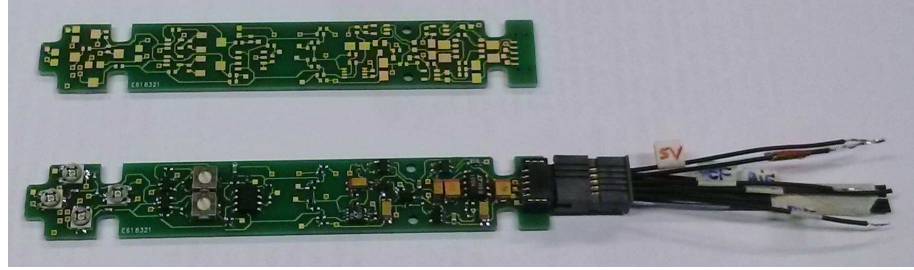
Photograph of two manufactured PCBs, one of them with all the components welded.
